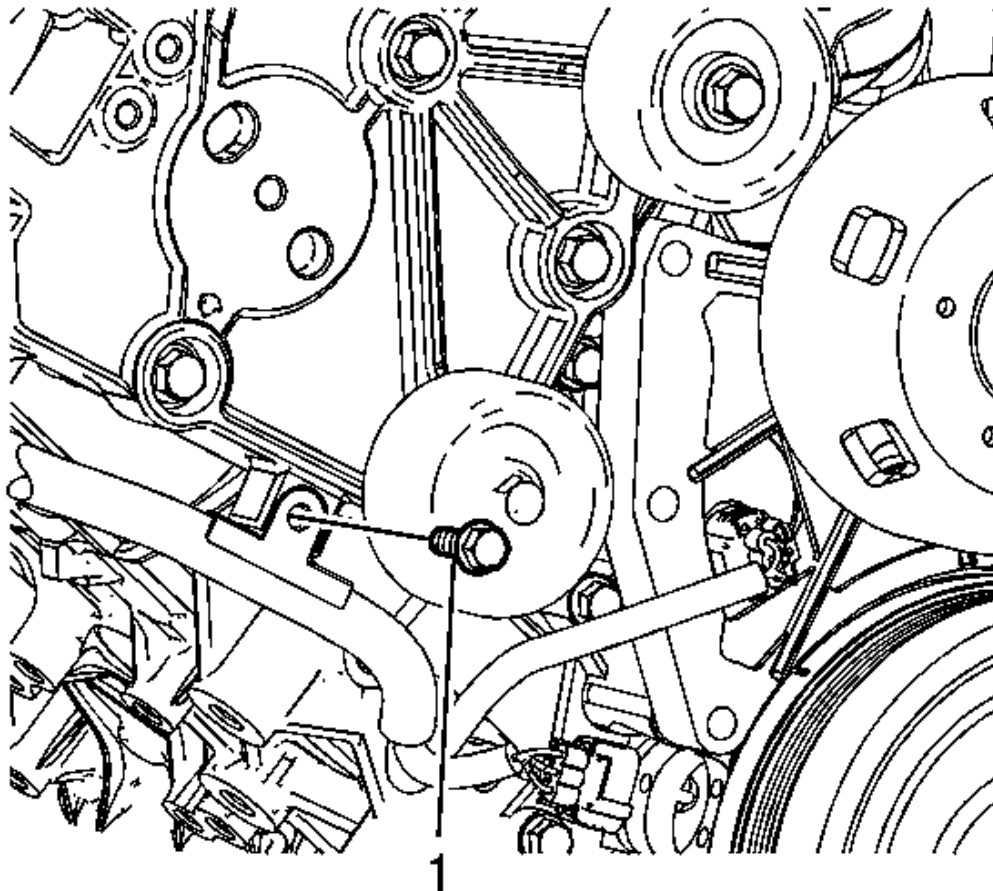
View Of Engine Wiring Harness Clip Bolt
